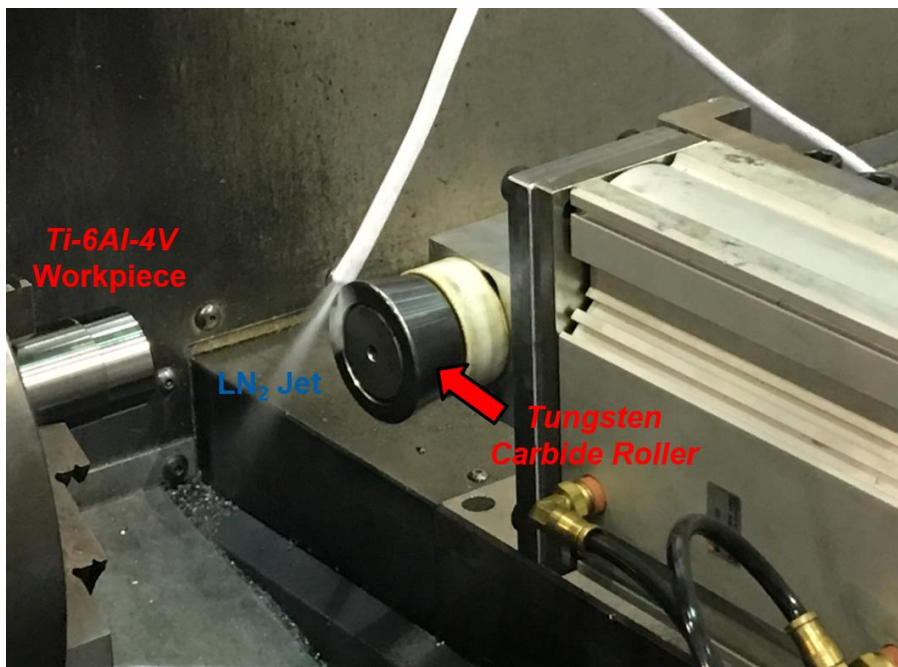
Nozzle location for external LN₂ during cryogenic burnishing.
